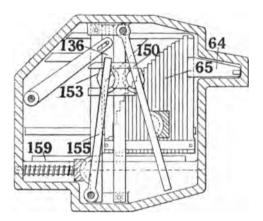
(Fig. 32, in patent abridgment.) Grant-Legros-Maw line-justifying machine. Measuring-box.
